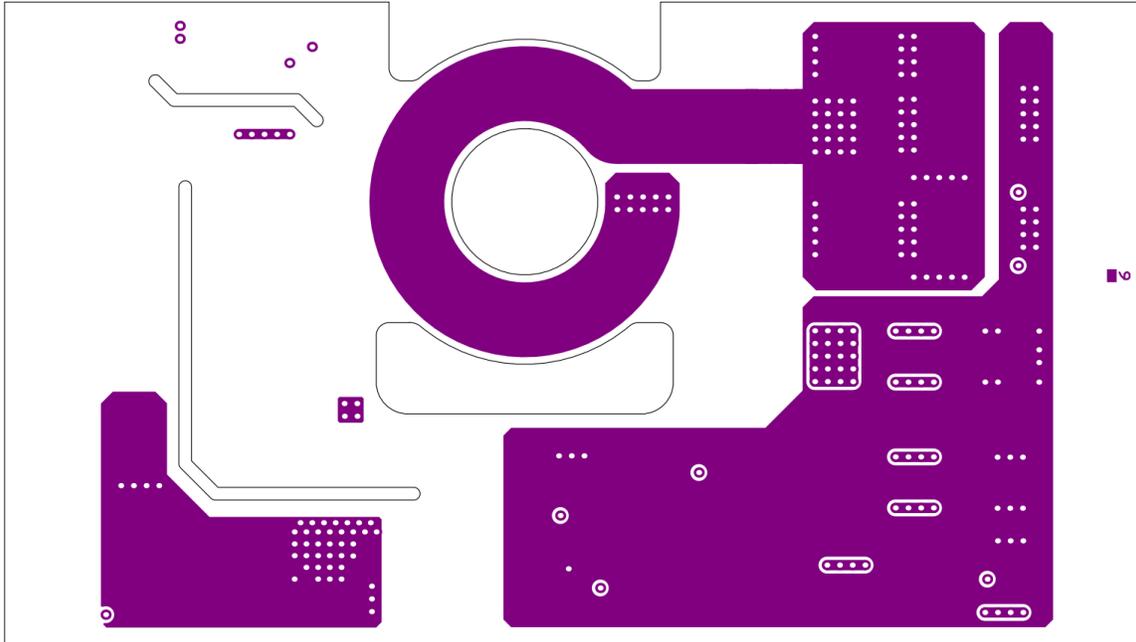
DER-1039Q Mid-Layer 3 PCB Layout.
